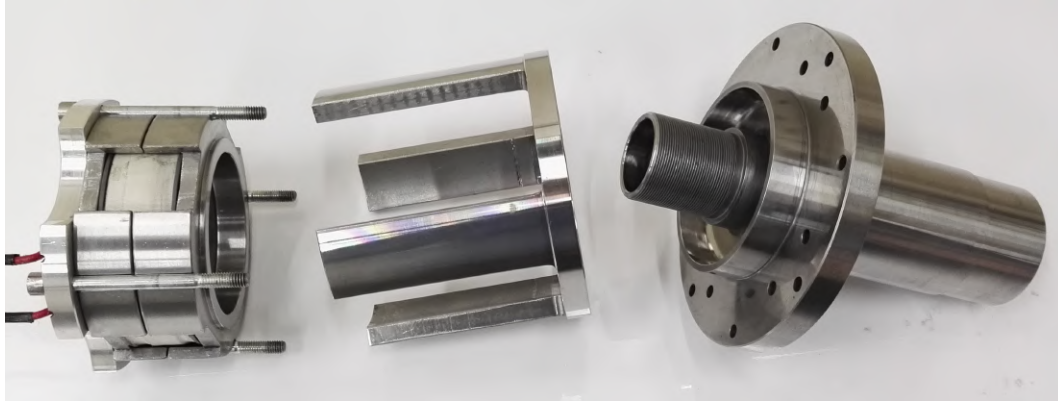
Disassembled internal engine components, showing the linear generator core (left) , the flexure legs (centre) and the flanged main body with piston and displacer bores (right)
